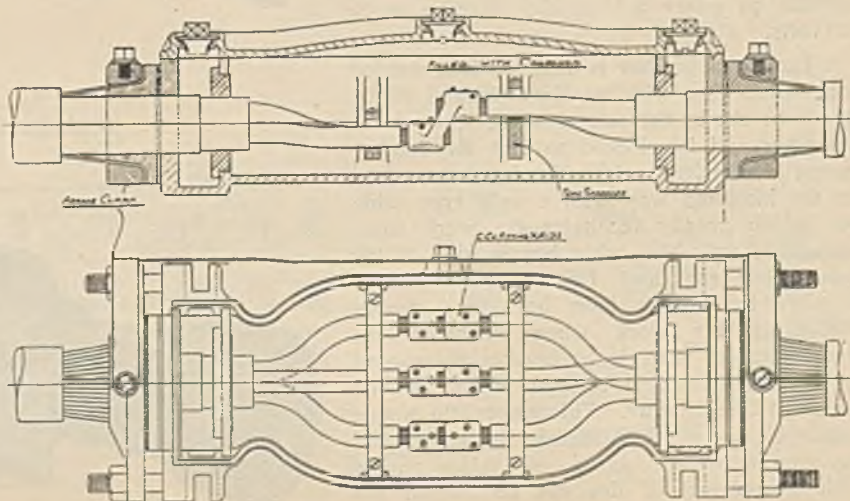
Callender Joint Box for Three-core Wire Armoured Cables.
